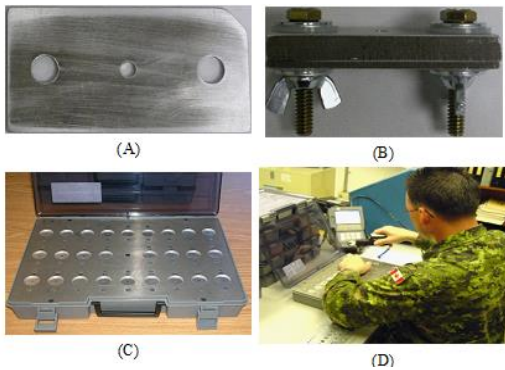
Single test coupons (A), Inspection set side view (B) Inspection set assembled in box (C), inspector performing eddy current inspection (D)
